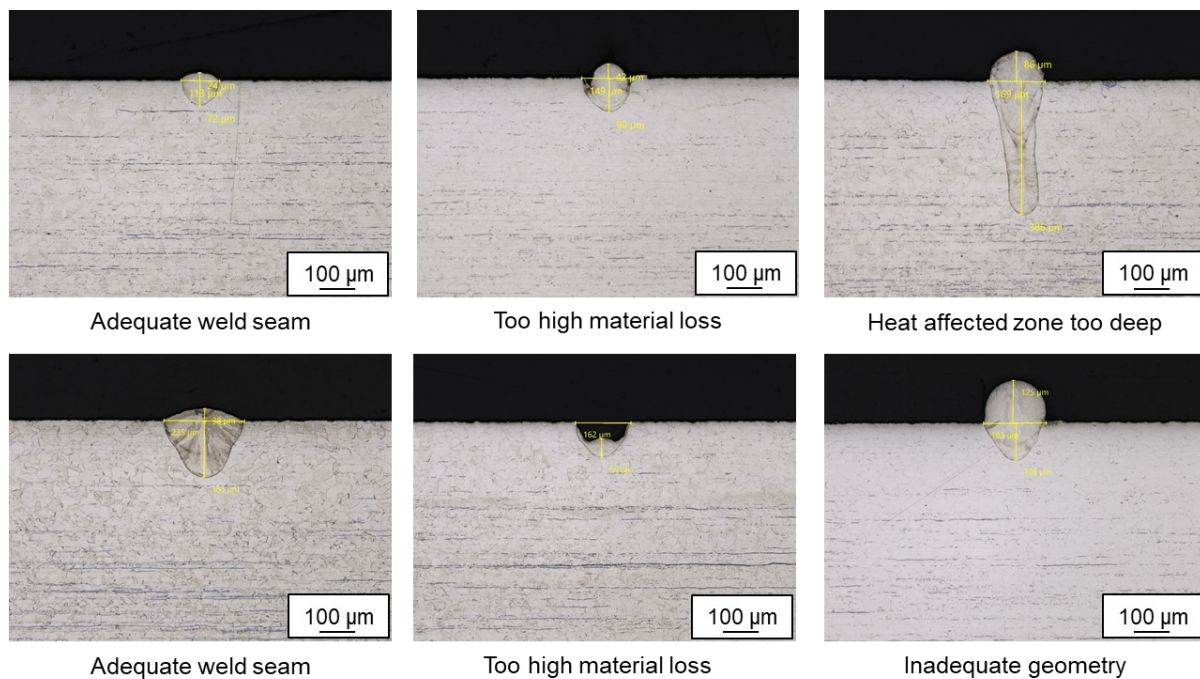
Investigations on weld seams made with the Additive Manufacturing technique.
